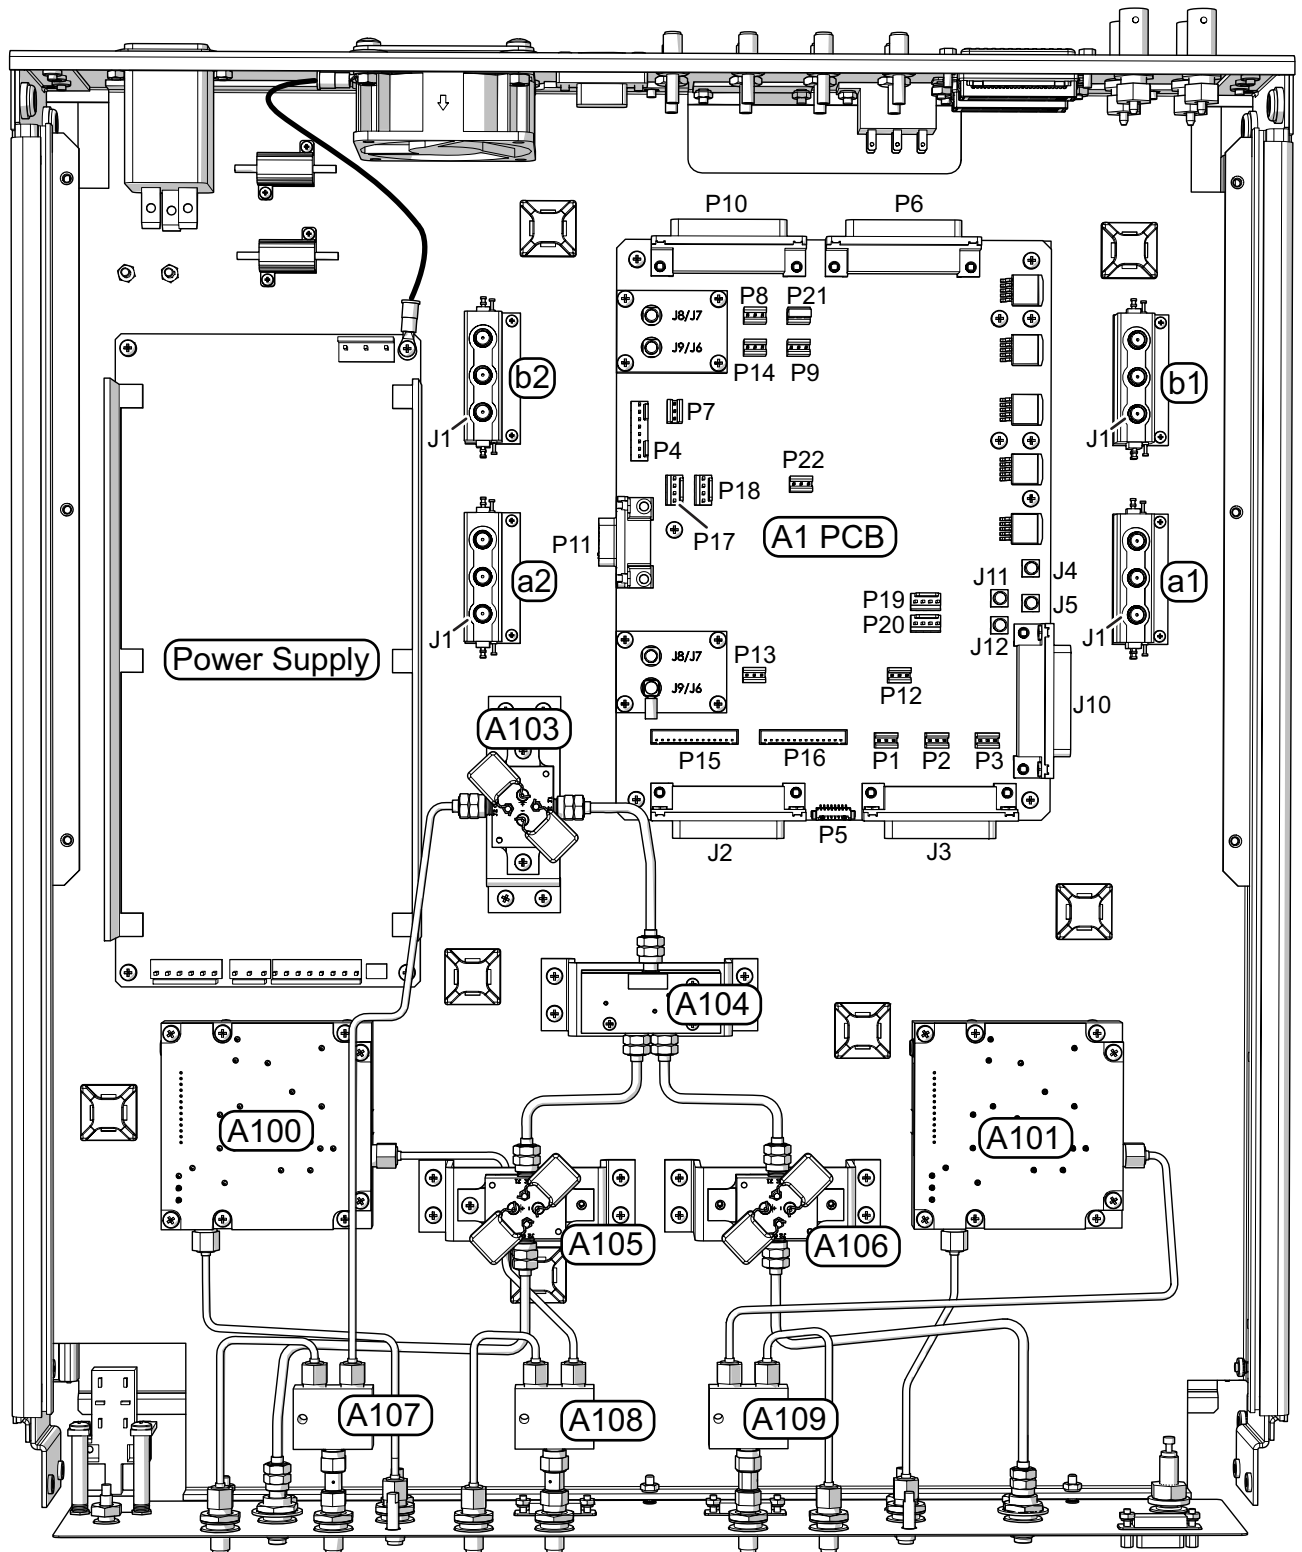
3736B Test Set – Parts Locations (1 of 2)
